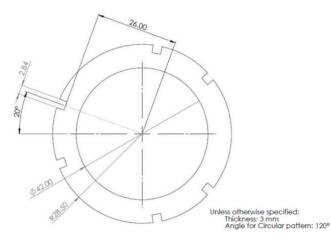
Example technical drawing showing the spider holder part of the speaker driver chassis
